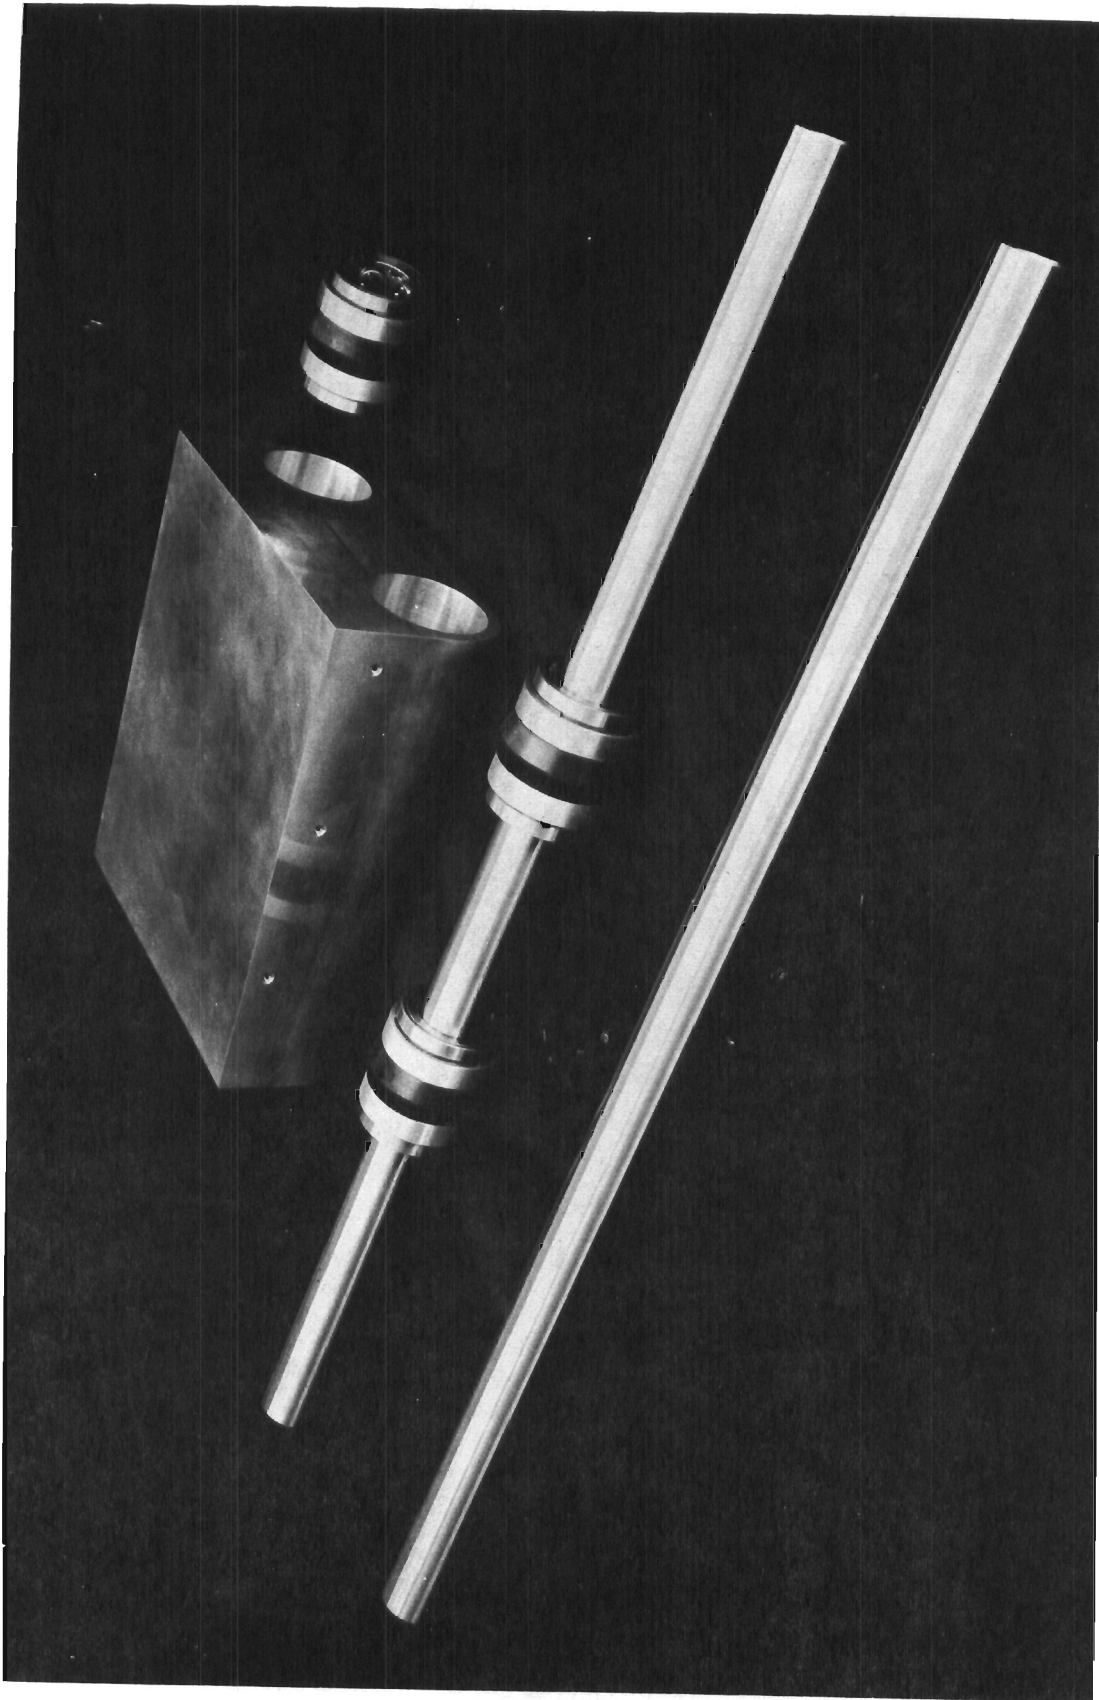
Carriage for First Horn Section - Shafts, Bushings, and Housing
